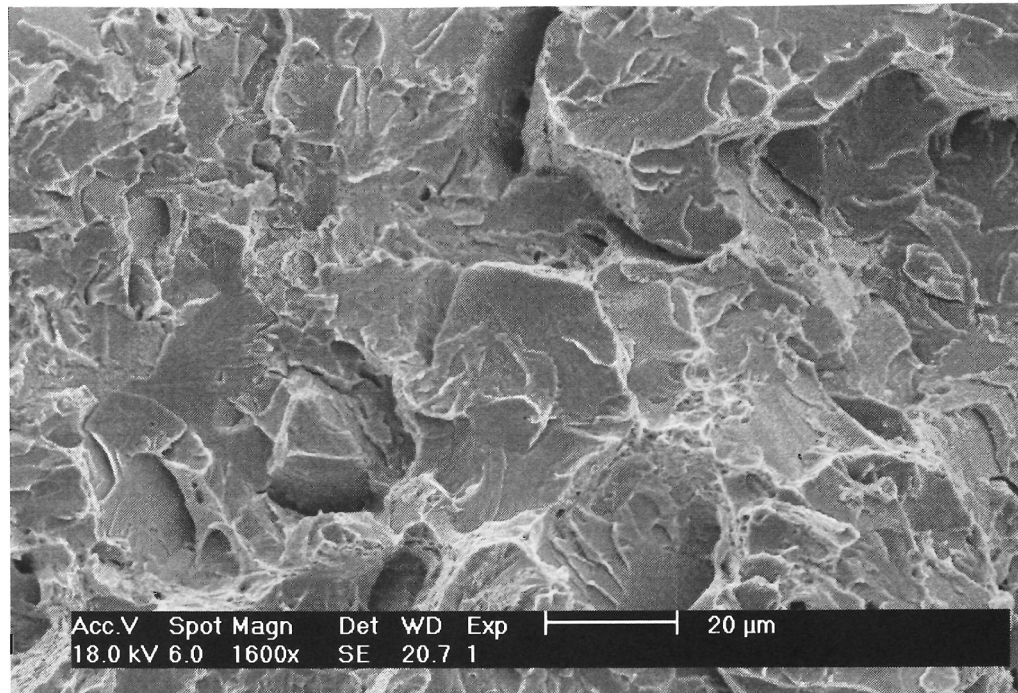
Typical Fast Fracture Surface (FFS)
